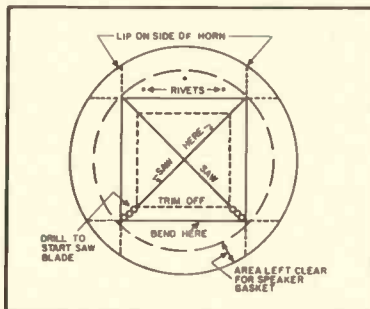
Detail of the speaker mounting ring to be attached to the horn of Fig. 3.
